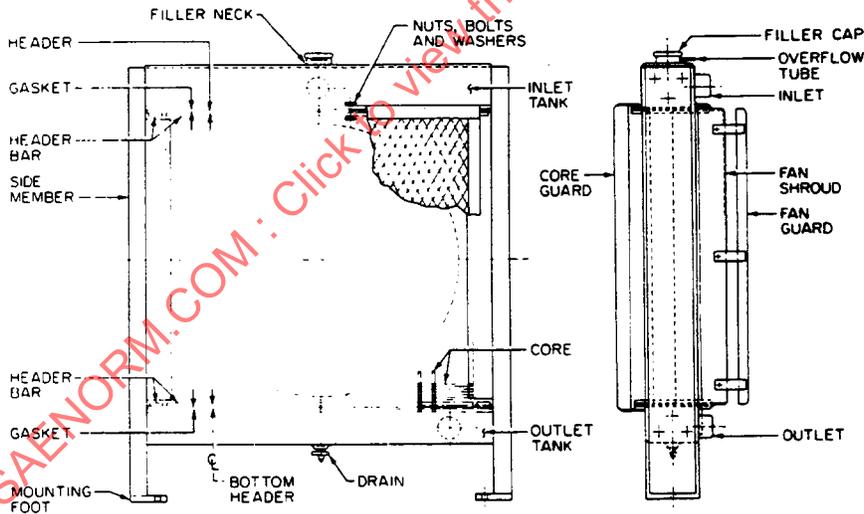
FABRICATED TYPE (ONE-PIECE CORE) RADIATOR
